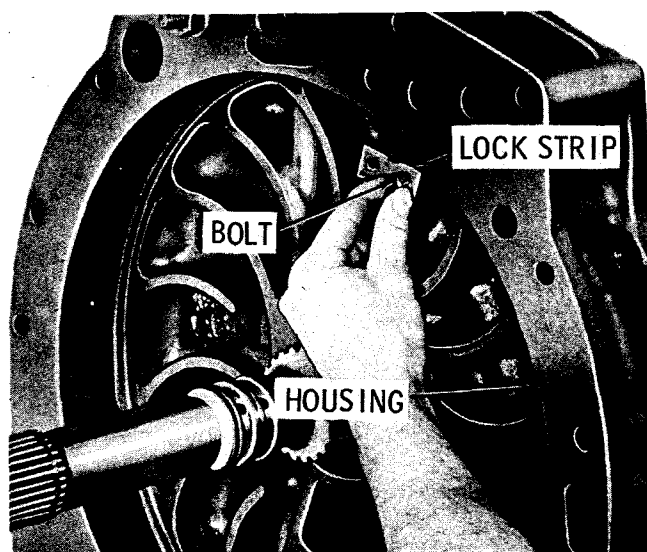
Installing first pitot tube bolt (CBT, CLBT, VCLBT) S1690
